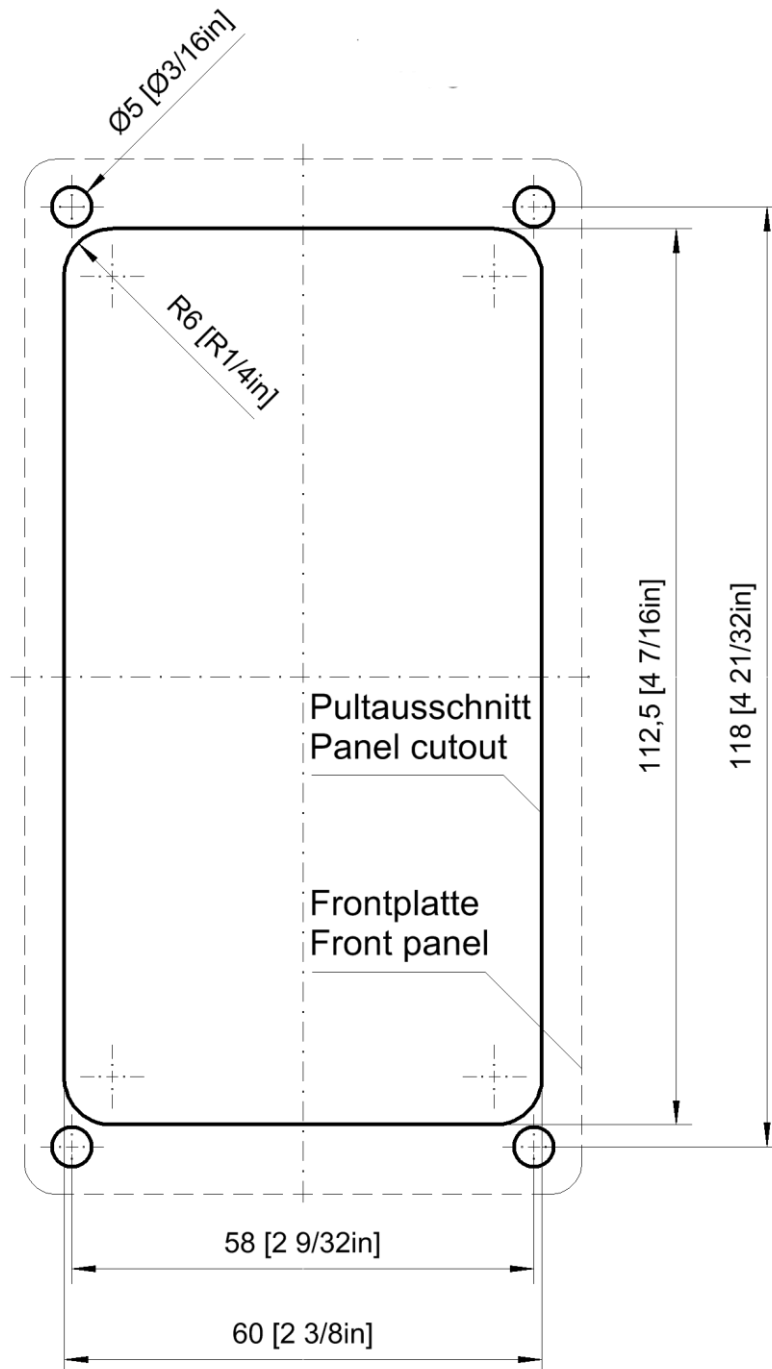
AHD-TCS OP A: Panel cutout and drill holes in millimeters
